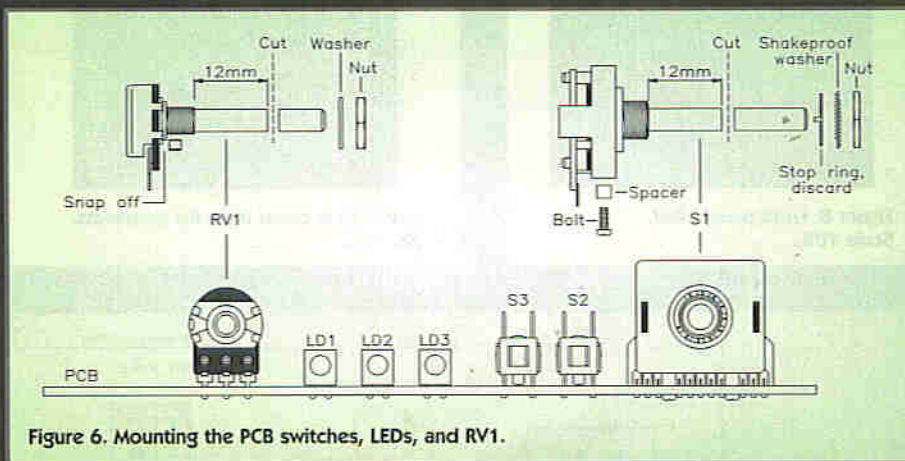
Mounting the PCB switches, LEDs, and RV1.
